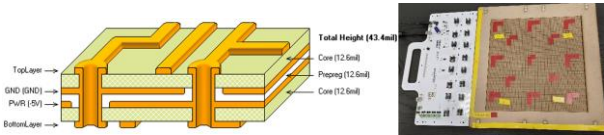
(Left) Example of Four-layer PCB (cross section) from [3]. (The dimensions are indicative and do not correspond to our manufacturer); (Right) Magnetic Experimental Device for Smartphone Positioning
